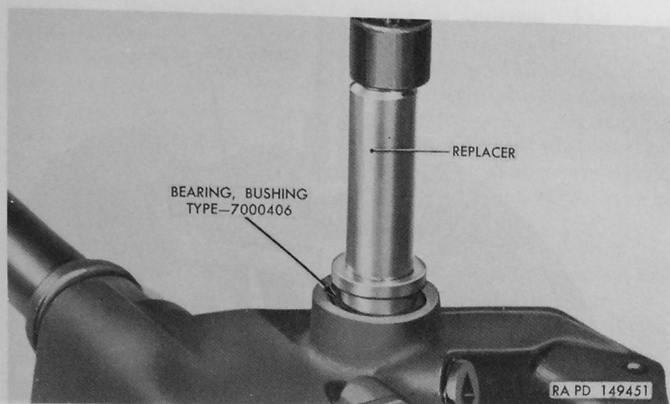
Installing Pitman arm shaft bearing into steering gear housing with replacer 41-R-2388-730.
